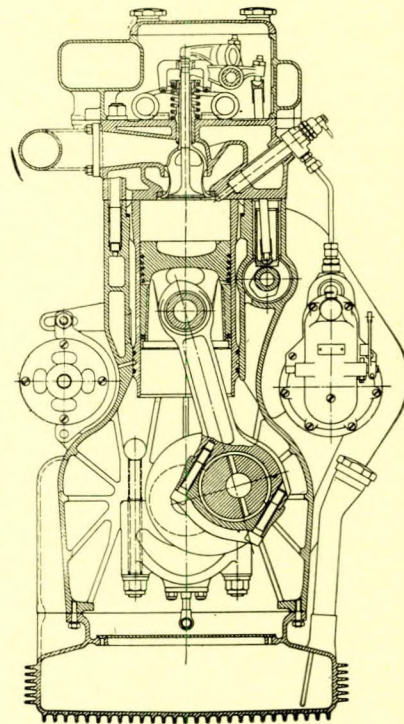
Transverse section through a Buchi telescope valve high speed Diesel engine
